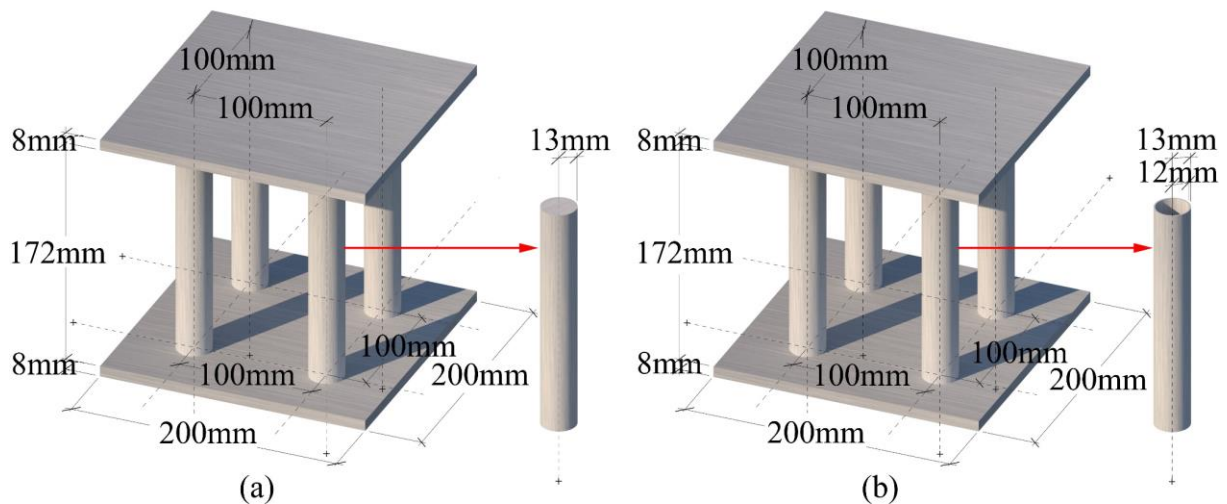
Schematic view of the panels with (a) Solid-truss bars and (b) Hollow-truss bars
